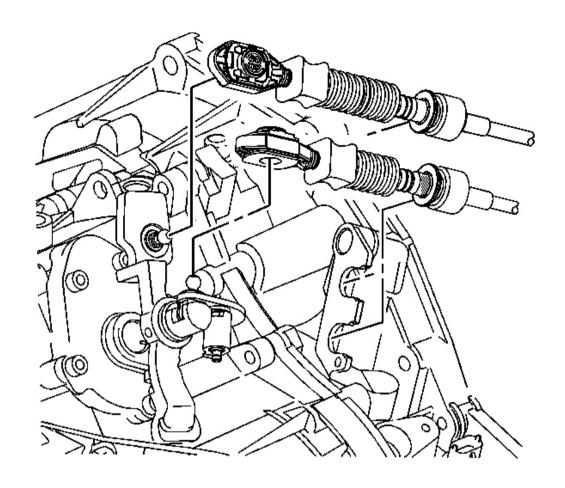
Shift Cables & Shift Cable Bracket Courtesy of GENERAL MOTORS CORP.
